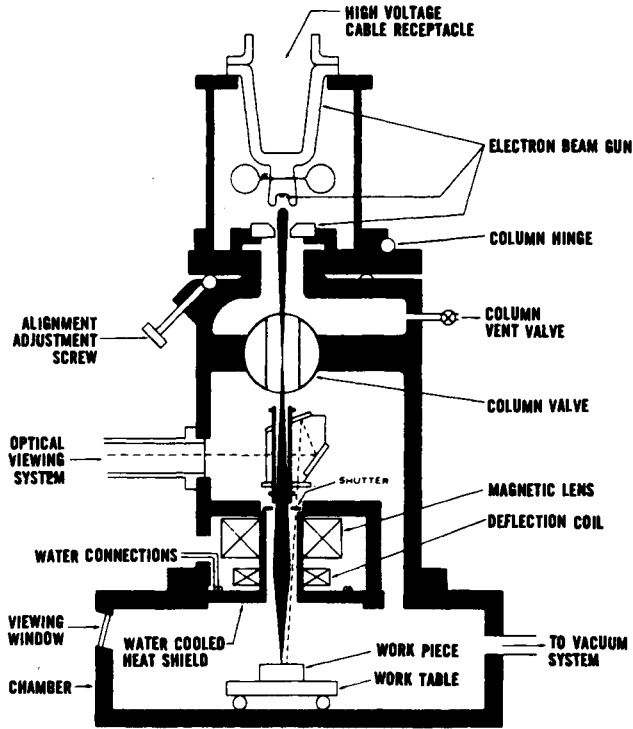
Schematic of high-voltage electron beam welding equipment.⁽¹³⁵⁾
